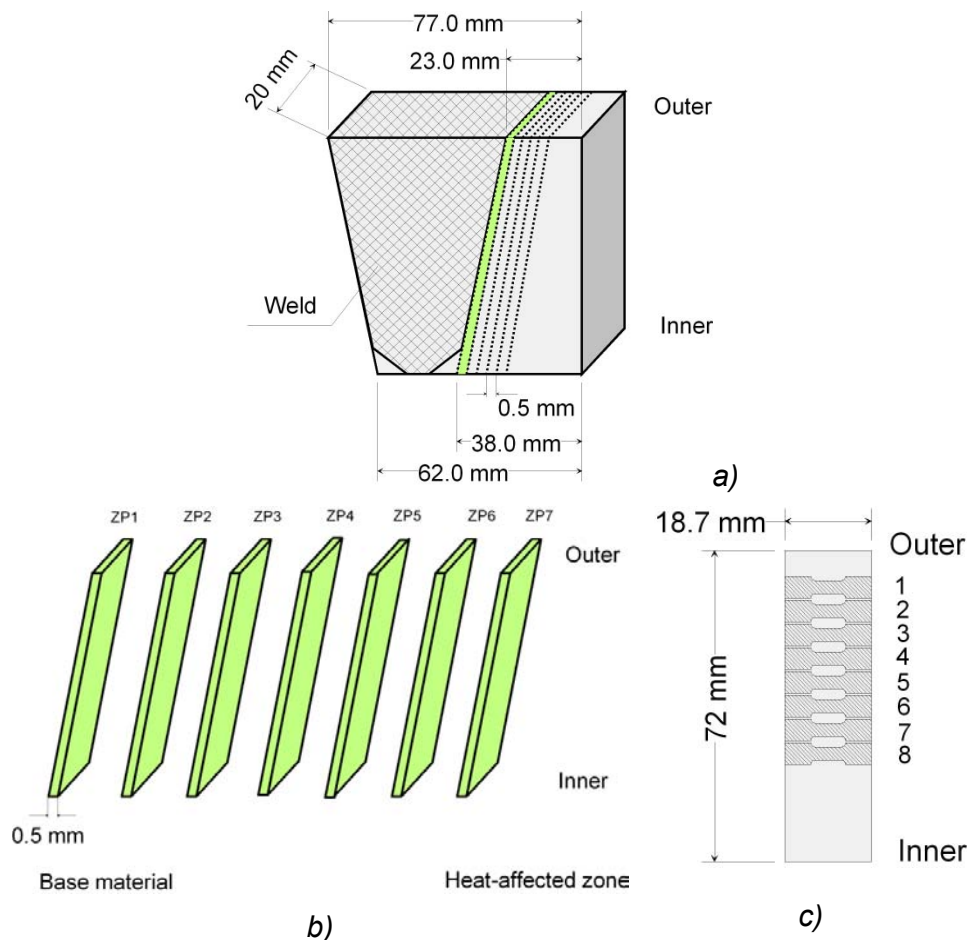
Cutting scheme of the in-service material, Block A and Block B. a) Cutting plan according to the weld geometry; b) numbering of the cut plates as a function of the distance from the fusion line; c) cutting of the tensile specimens inside one plate, and numbering as a function of the accumulated dose.
